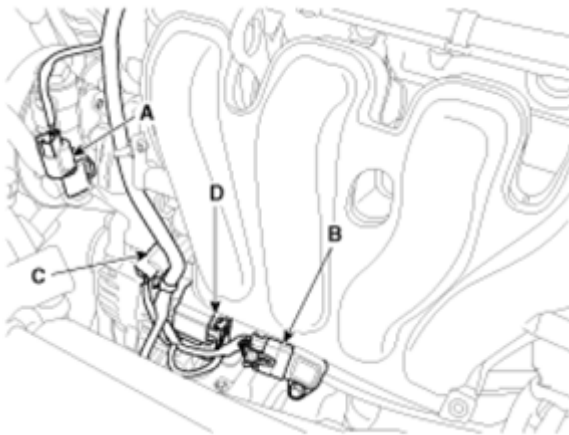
Power Steering Fluid Pressure Switch, MAP Sensor, OPS & Alternator Connectors
